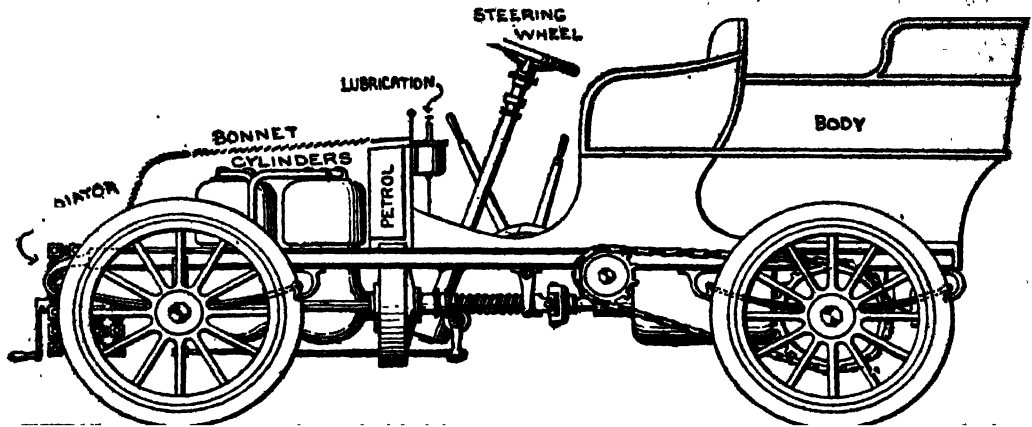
CHAIN DRIVEN MOTOR CAR (ELEVATION).
